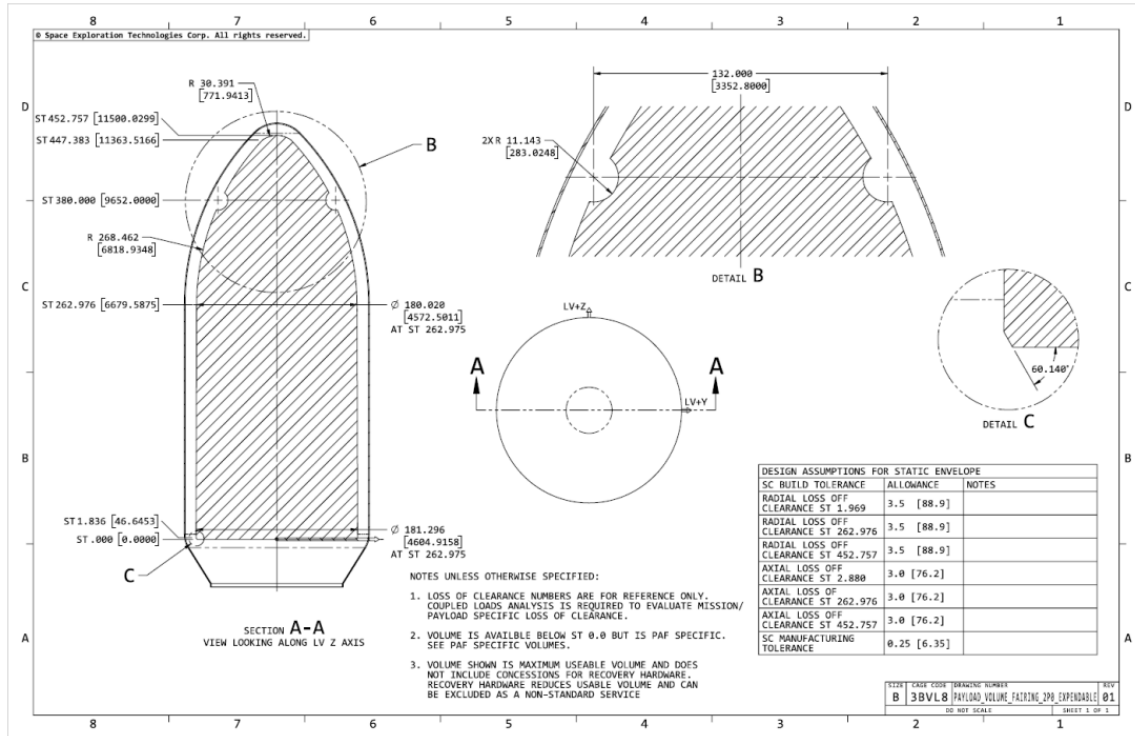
Engineering drawing of the Falcon 9 payload fairing with relevant dimensions
